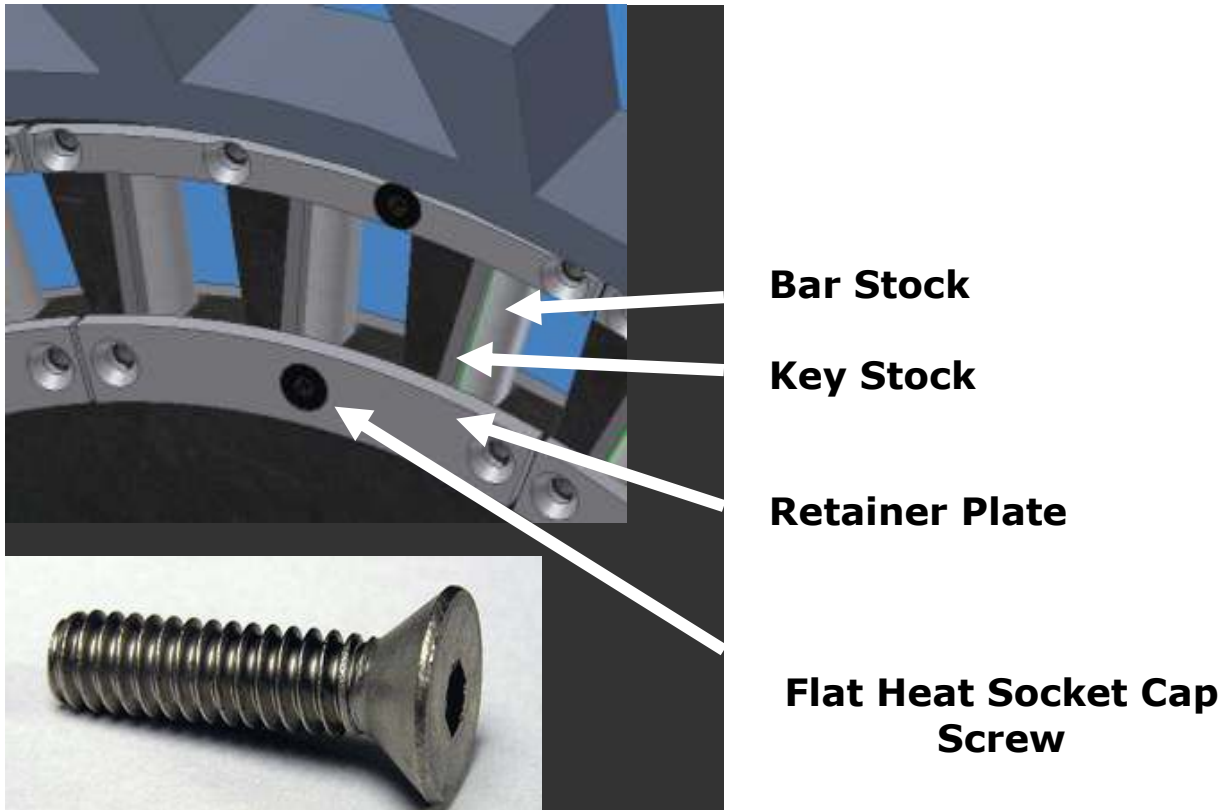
Close Up of Bolt on Retainer Plates and Retaining Bolt.
